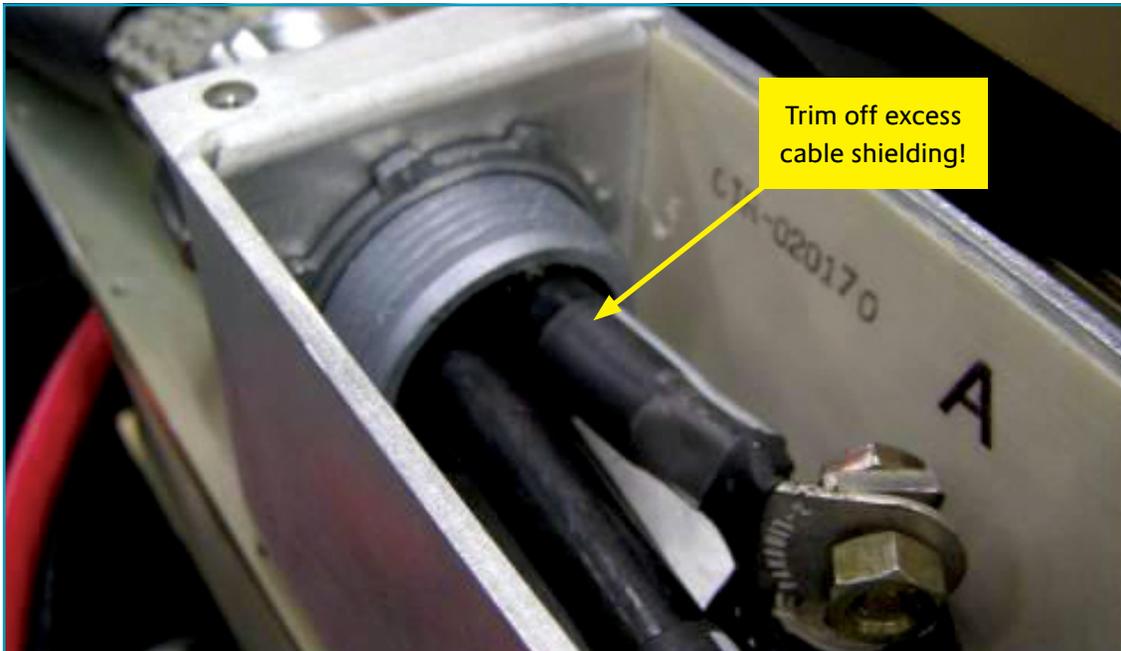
DMOc445 Motor Power Cable, Trim Shielding
